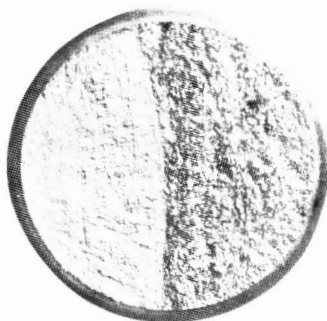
Appearance of fracture surface of molybdenum-base TZC alloy fatigue tested at 2000° F (1093° C), 19 kilohertz, and  $<1 \times 10^{-7}$  torr vacuum,  $\times 10$ .
